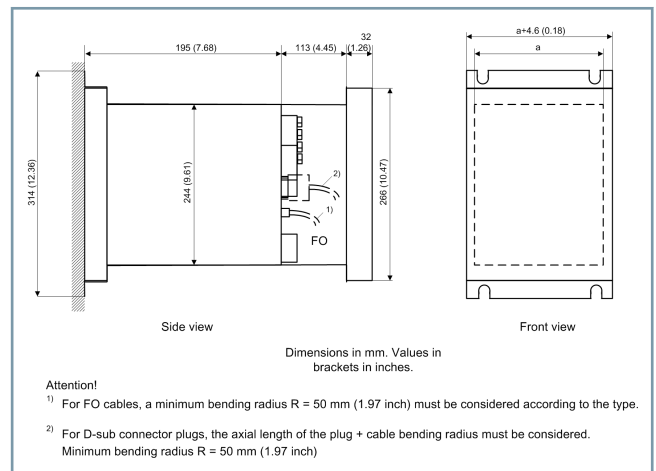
/6 1/3 Surface Mounting Device with Integrated On-site Operation Panel; Dimensions in the Side and Front Views
